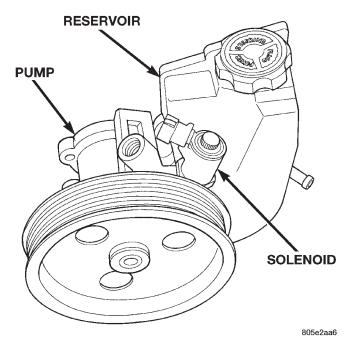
Speed Proportional Steering Solenoid POWER STEERING GEAR
